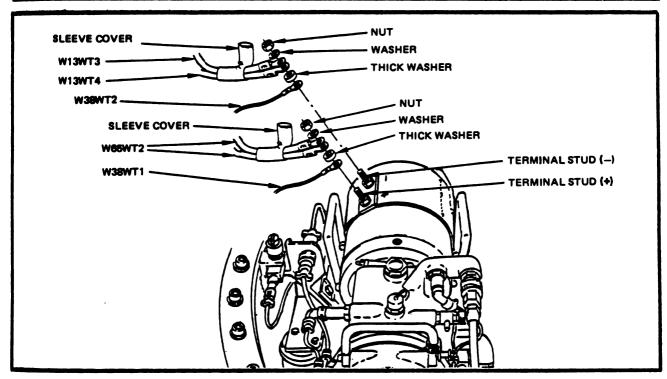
BaselTurret Interconnecting Cable Assemblies (Sheet 2 of 4)
